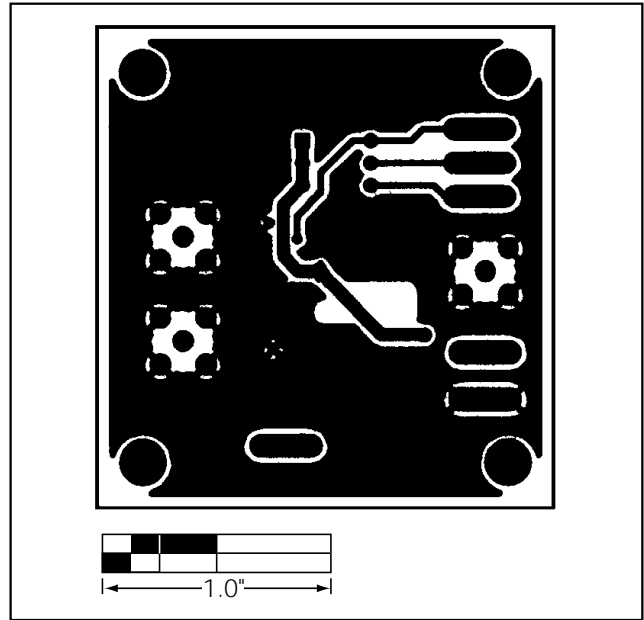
MAX4159 EV Kit PC Board Layout—Solder Side
